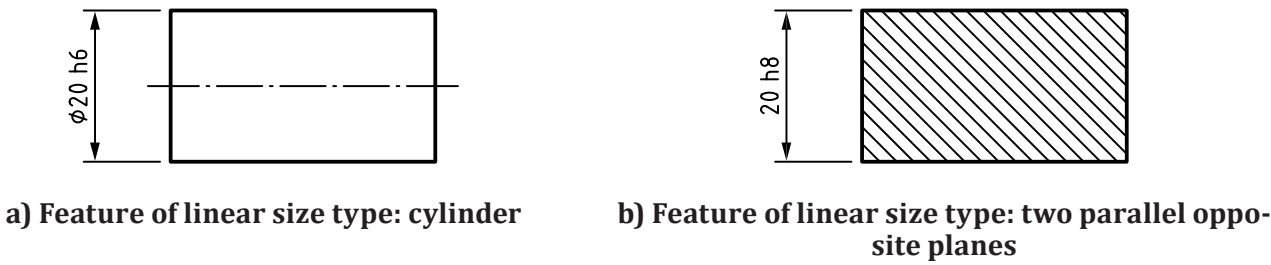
Example of basic linear size specification — Nominal size followed by tolerance code
